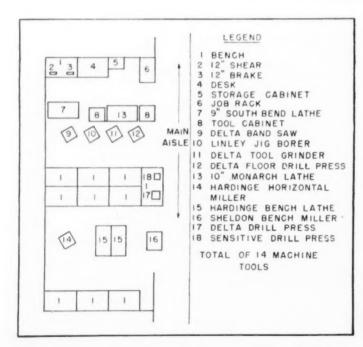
General lay-out of the short-order machine shop, which indicates the types and arrangement of machines
